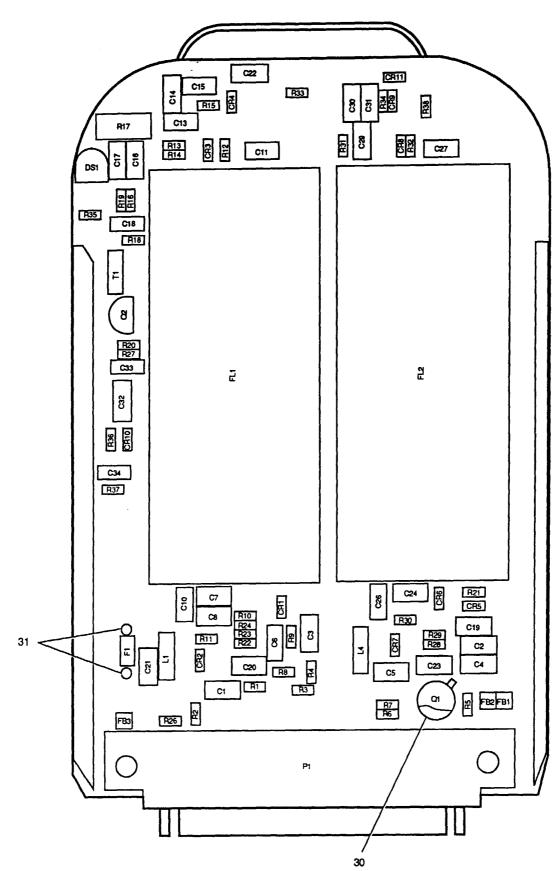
A8 2ND IF Board Assembly (Sheet 1 of 2)
